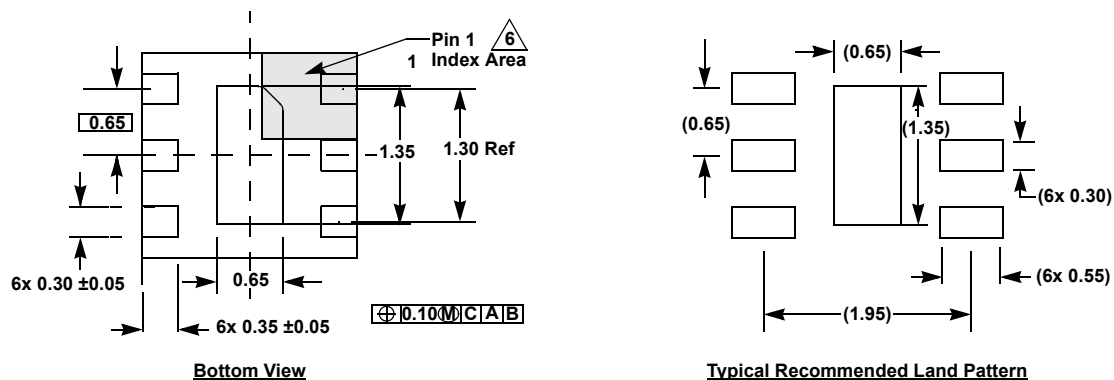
6 Ld ODFN Footprint (Left) and Corresponding Land Pattern for PCB Design (Right)
